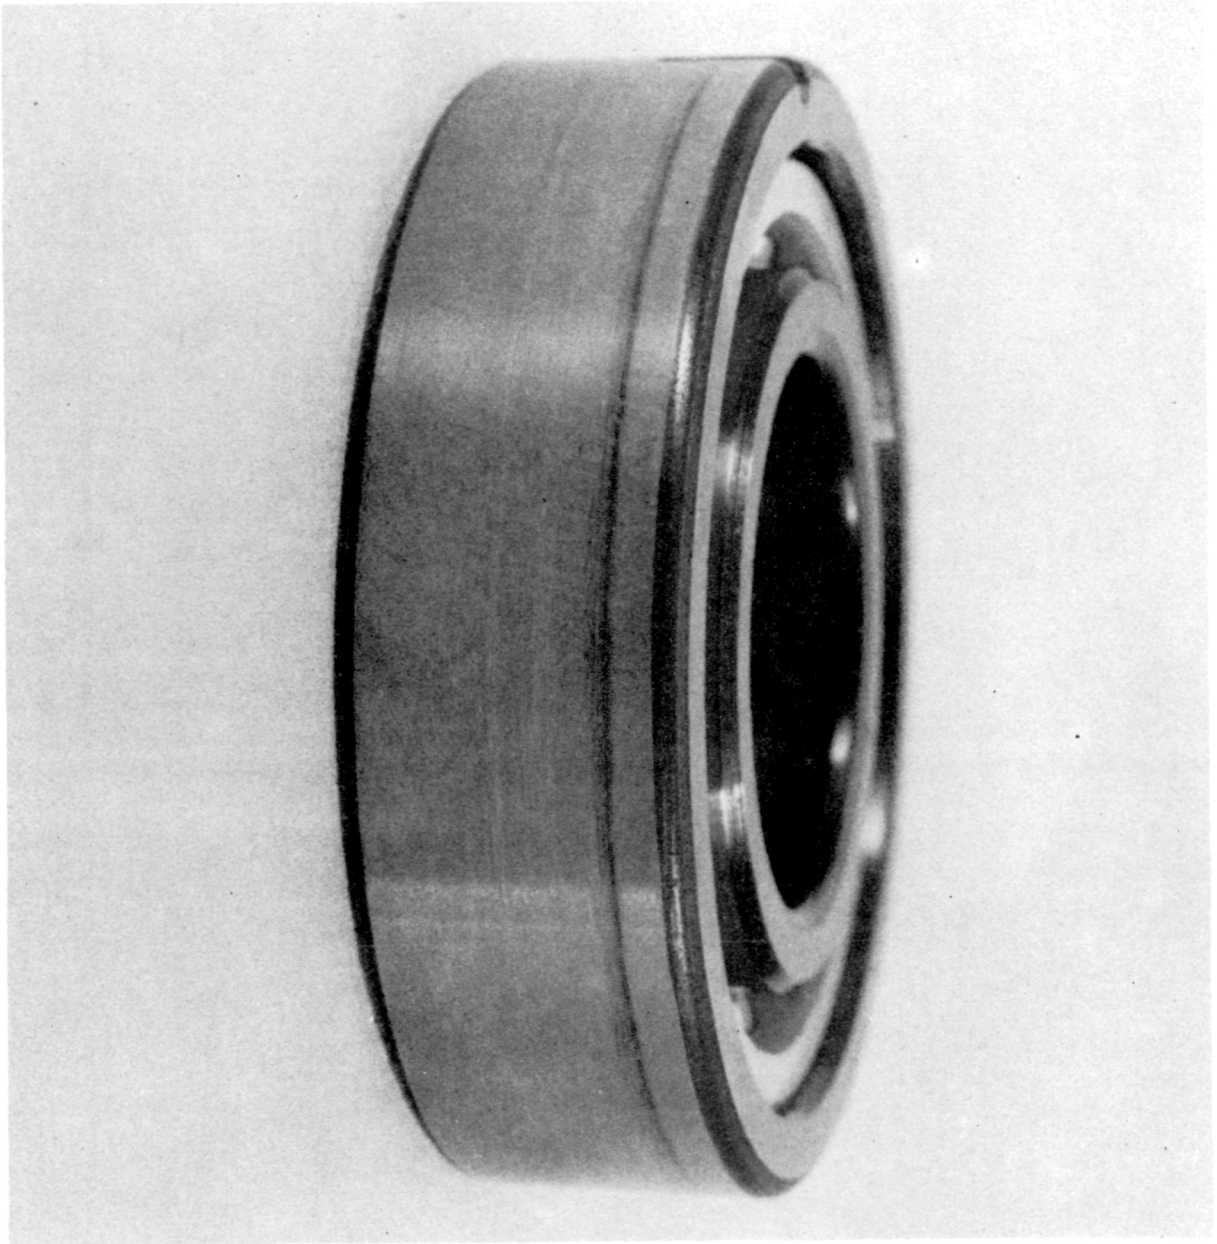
NASA 6:1 Compressor Test Rig, Inducer Failure, Bearing P/N 976693-1, Evidence of Outer Race Rotation.
